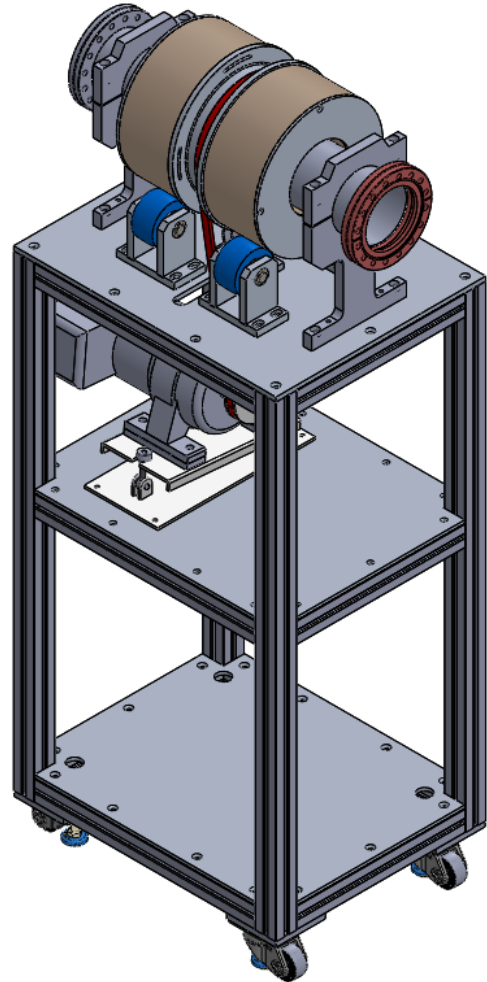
Final three-dimensional design drawing of the Beam Wobbler Using Halbach Dipole Magnets.
